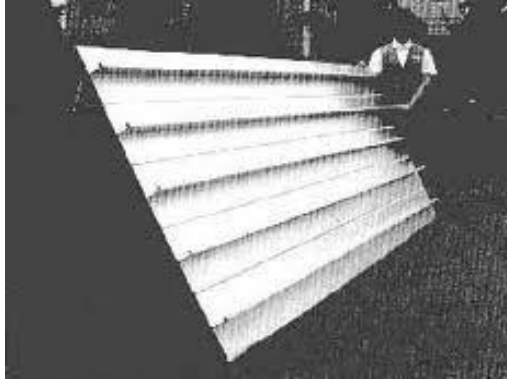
Friction Stir Welded Aluminum panels in ship building [8]
